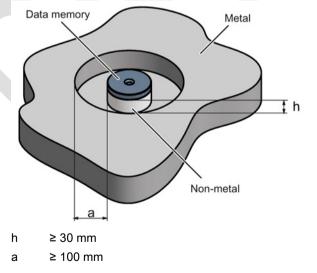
Flush-mounting of the MDS D139/D339 in metal with spacer
